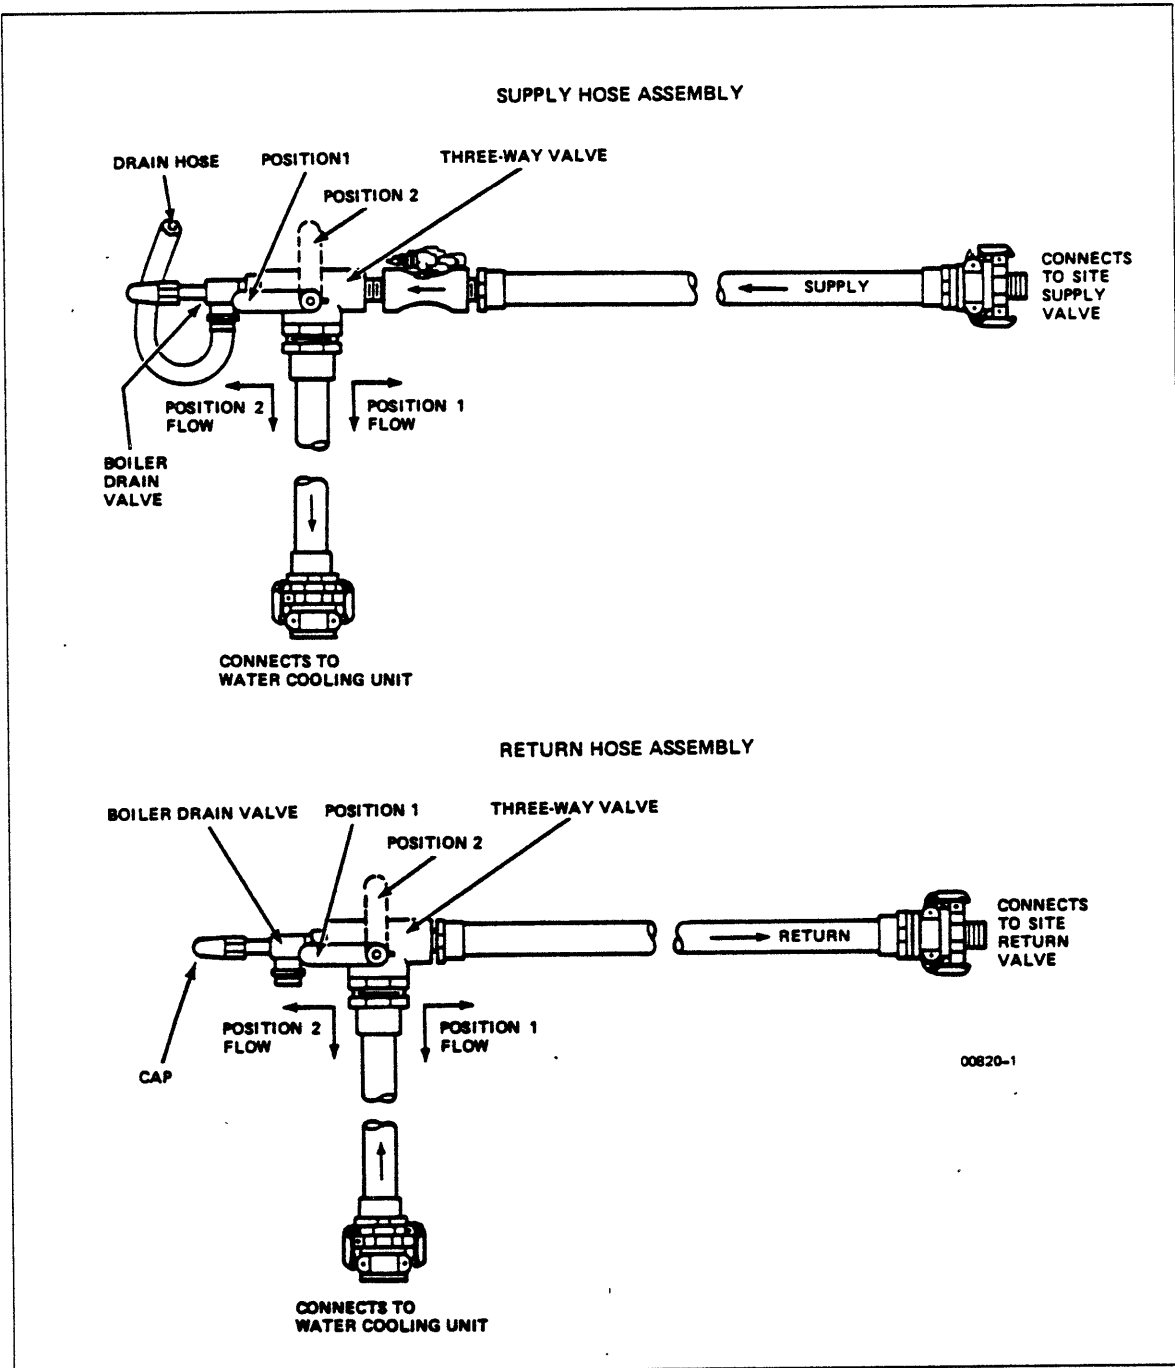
Site Supply and Return Hose Assemblies 3-Way Valves
